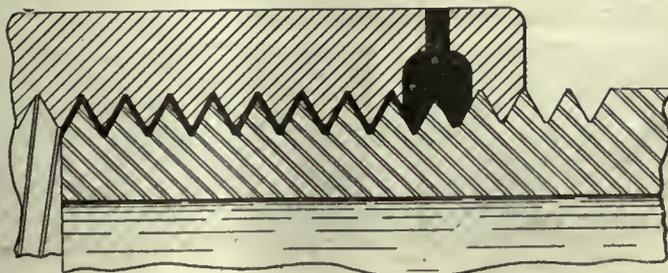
STRAIGHT THREADS WITH PACKING AND LOCKNUT.
